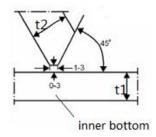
A.1 Joint design between lower sloping plate, bulkhead stool sloping plate and inner bottom
